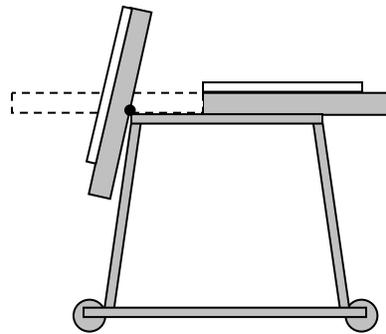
Table used to combine two 16 cell extrusions into a 32 cell extrusion assembly. The 2 extrusions are shown in white on the drawing.
